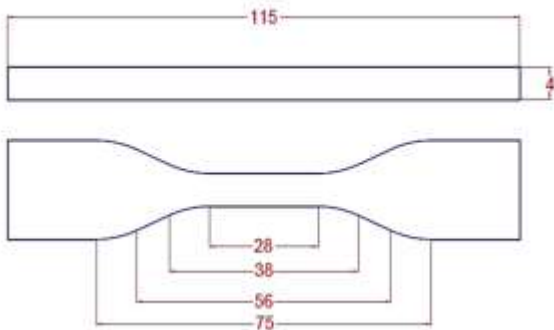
The geometrical dimensions of the tensile test specimens (in millimeters).
